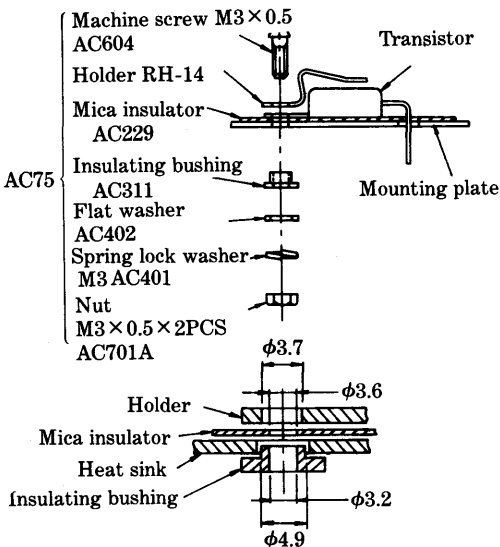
Mounting transistor TO-3 (2-21D1A) on a heat sink
